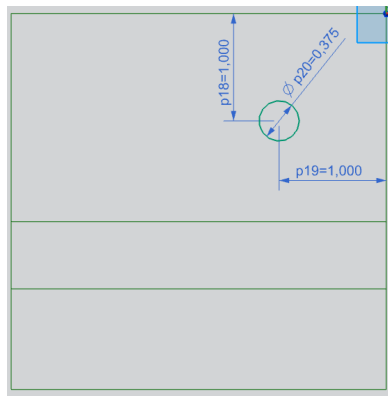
Side 3/8" diameter 3" depth hole, design will require a symmetrical hole on the other side
